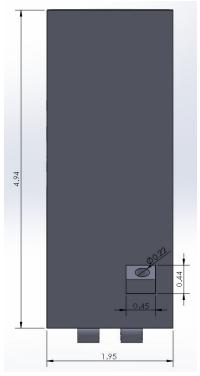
Stabilizing Leg Front View Dimensions
